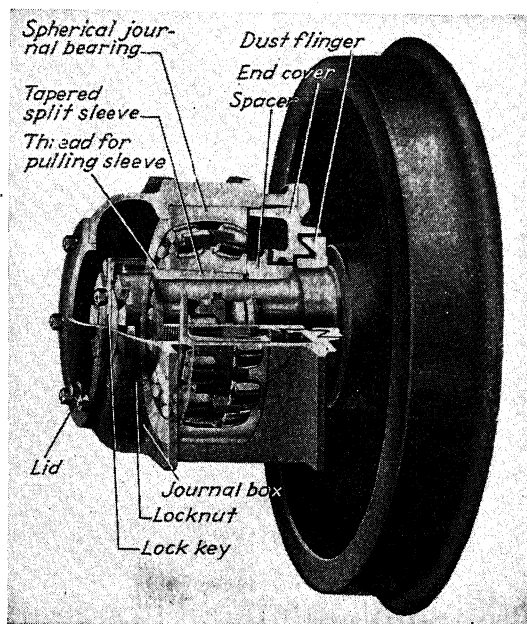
Application of roller bearing to a car axle. (Courtesy SKF Industries Inc.)
